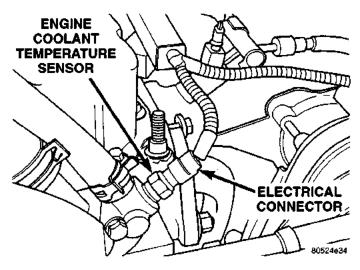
Engine Coolant Temp. Sensor—4.0L Shown
